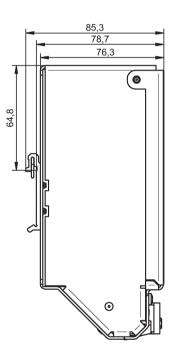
Dimension drawing 6EP4132-0GB00-0AY0
